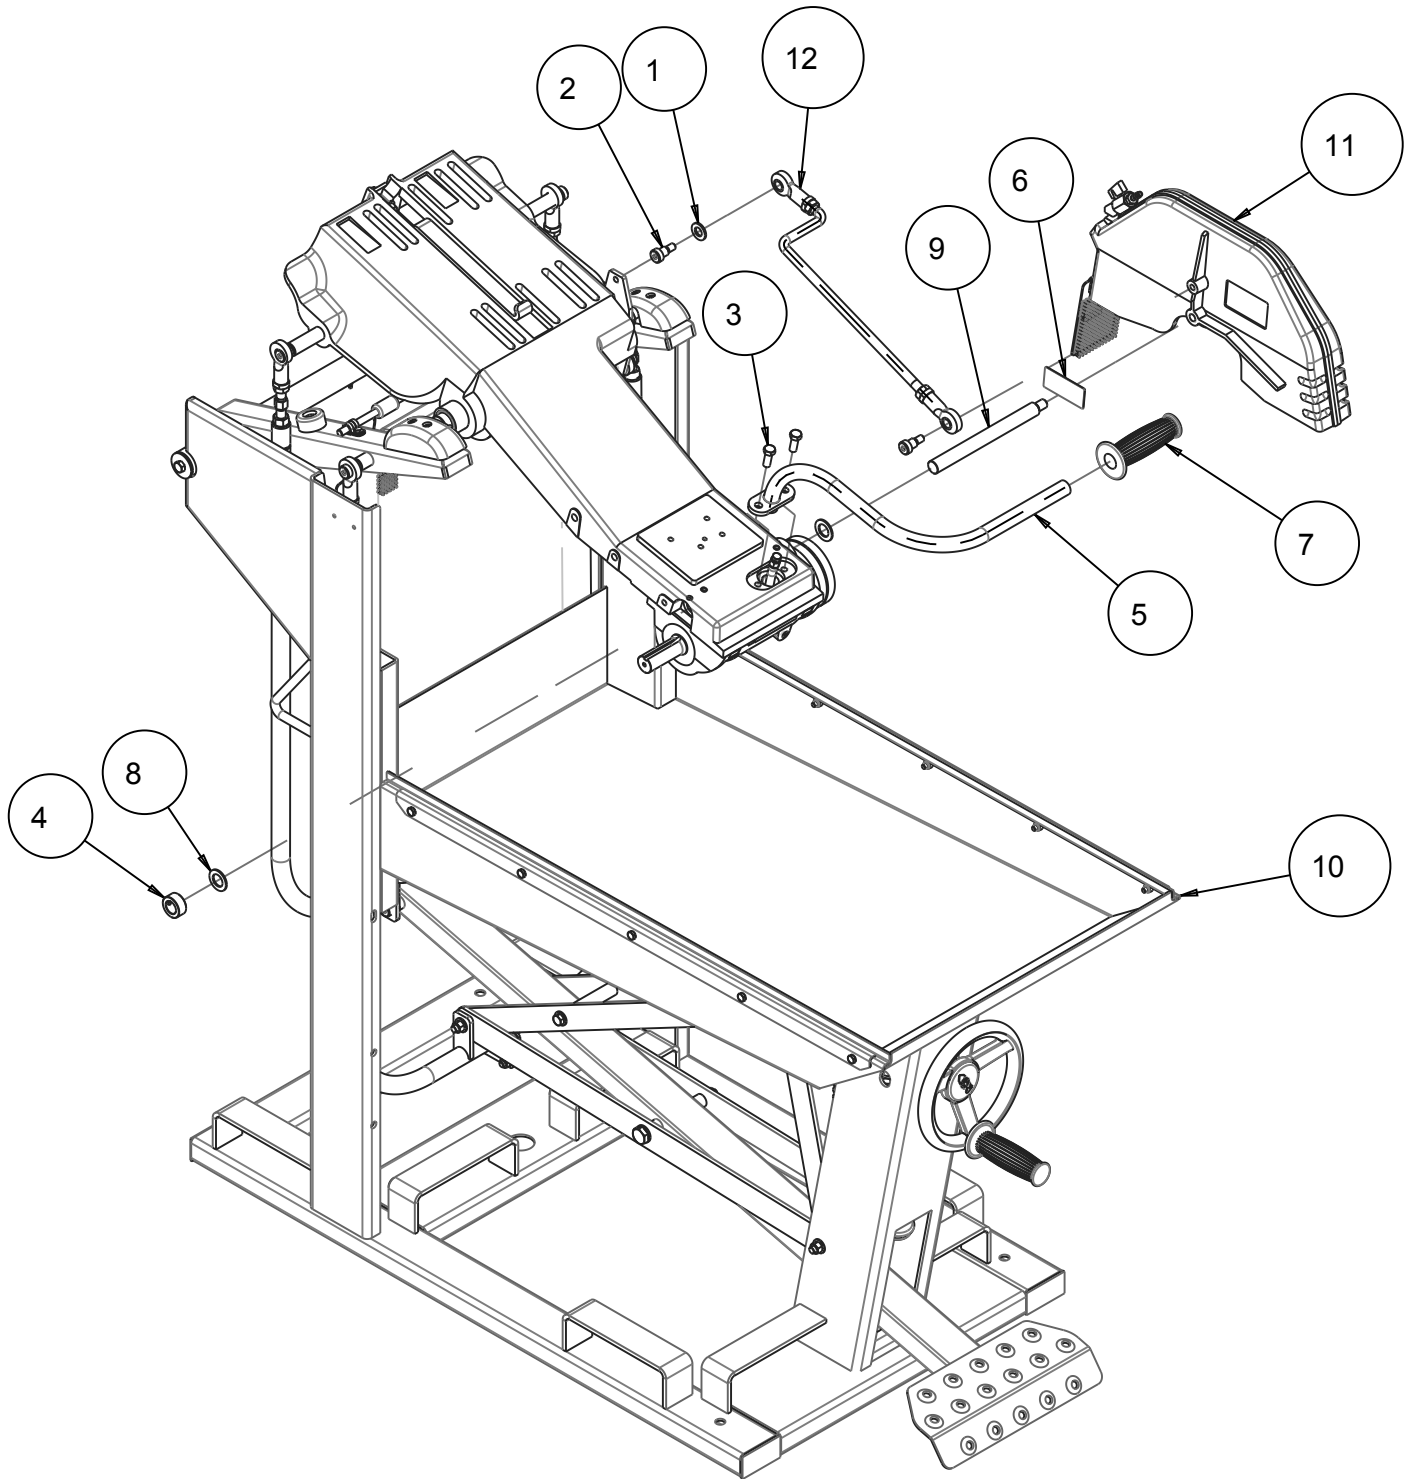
MK-5000 BLOCK SAW 14IN BLADE GUARD P/N 172446-14
